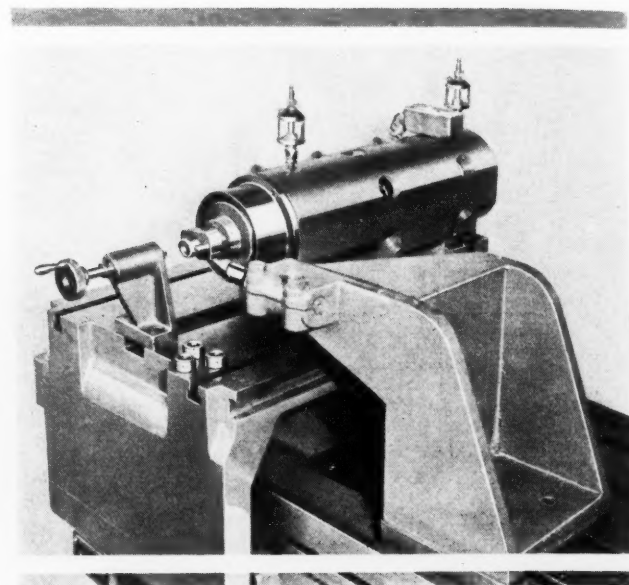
Ex-Cell-O Diamond Boring Machine Facing a Bronze Seal Ring for a Gas-tight Fit
